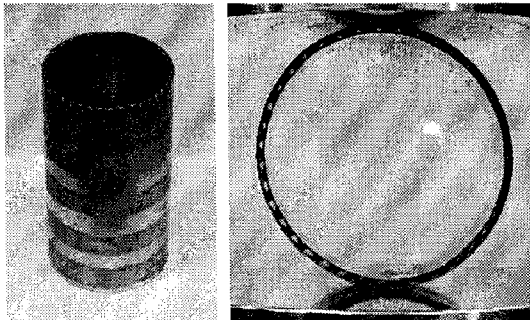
Example of metallic sandwich tube with a truss core; fabricated by brazing (diameter of inner tube : 80 mm, width : 30 mm, thickness : 3.3 mm)
